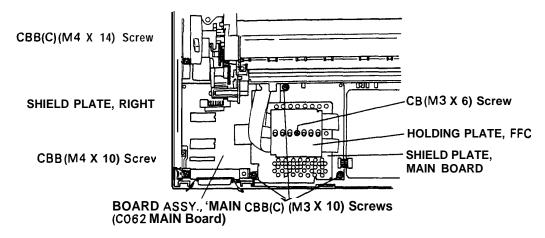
Removing the SHIELD PLATE, MAIN BOARD
